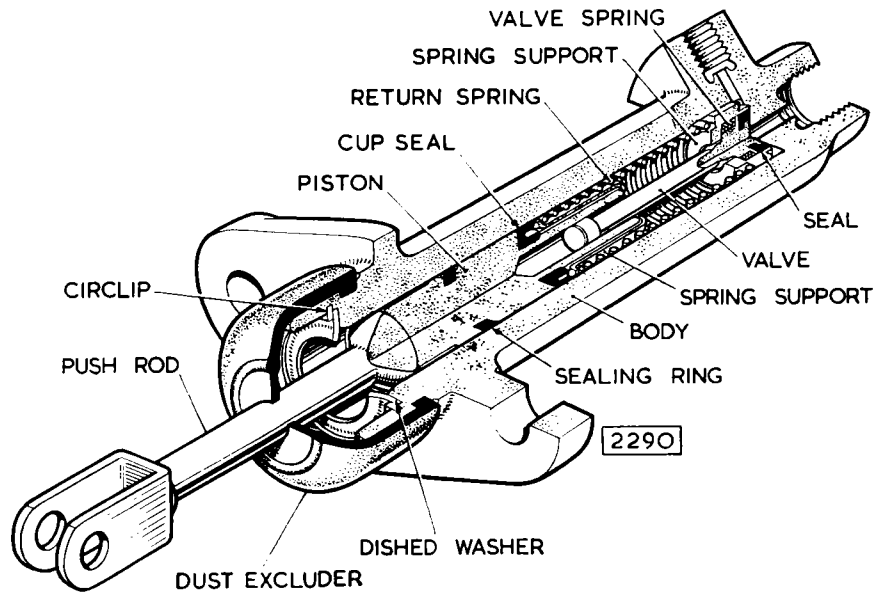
Sectioned view of the upper master cylinder (rear brakes)
